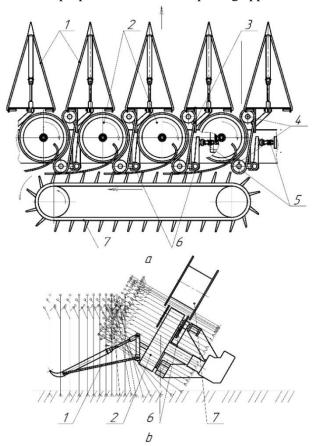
Disc-belt flax pulling apparatus: 1 – dividers; 2 – pulling discs; 3 – pulling belts; 4 – rollers; 5 – spring–loaded fasteners; 6 – guide bars; 7 – transverse conveyor; a – top view; b – side view
